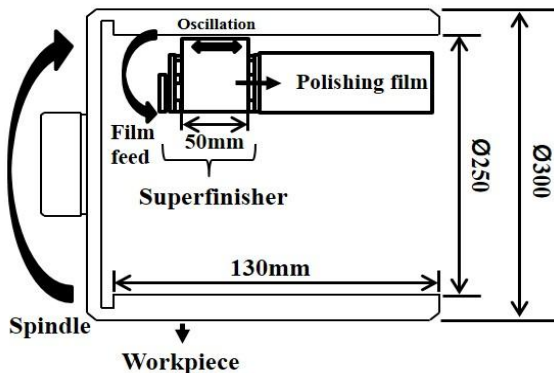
Schematics of inner surface superfinishing equipment used in this experiment
